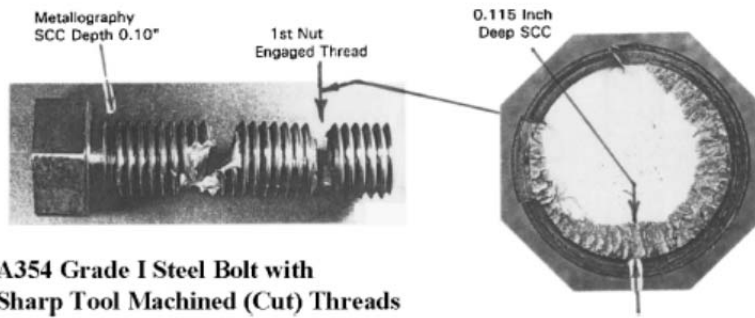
IGSCC site shape and crack depth in cut threads of grade steel fasteners, tensioned for fractographic evaluation, after one day of SCC testing at 414 MPa.
